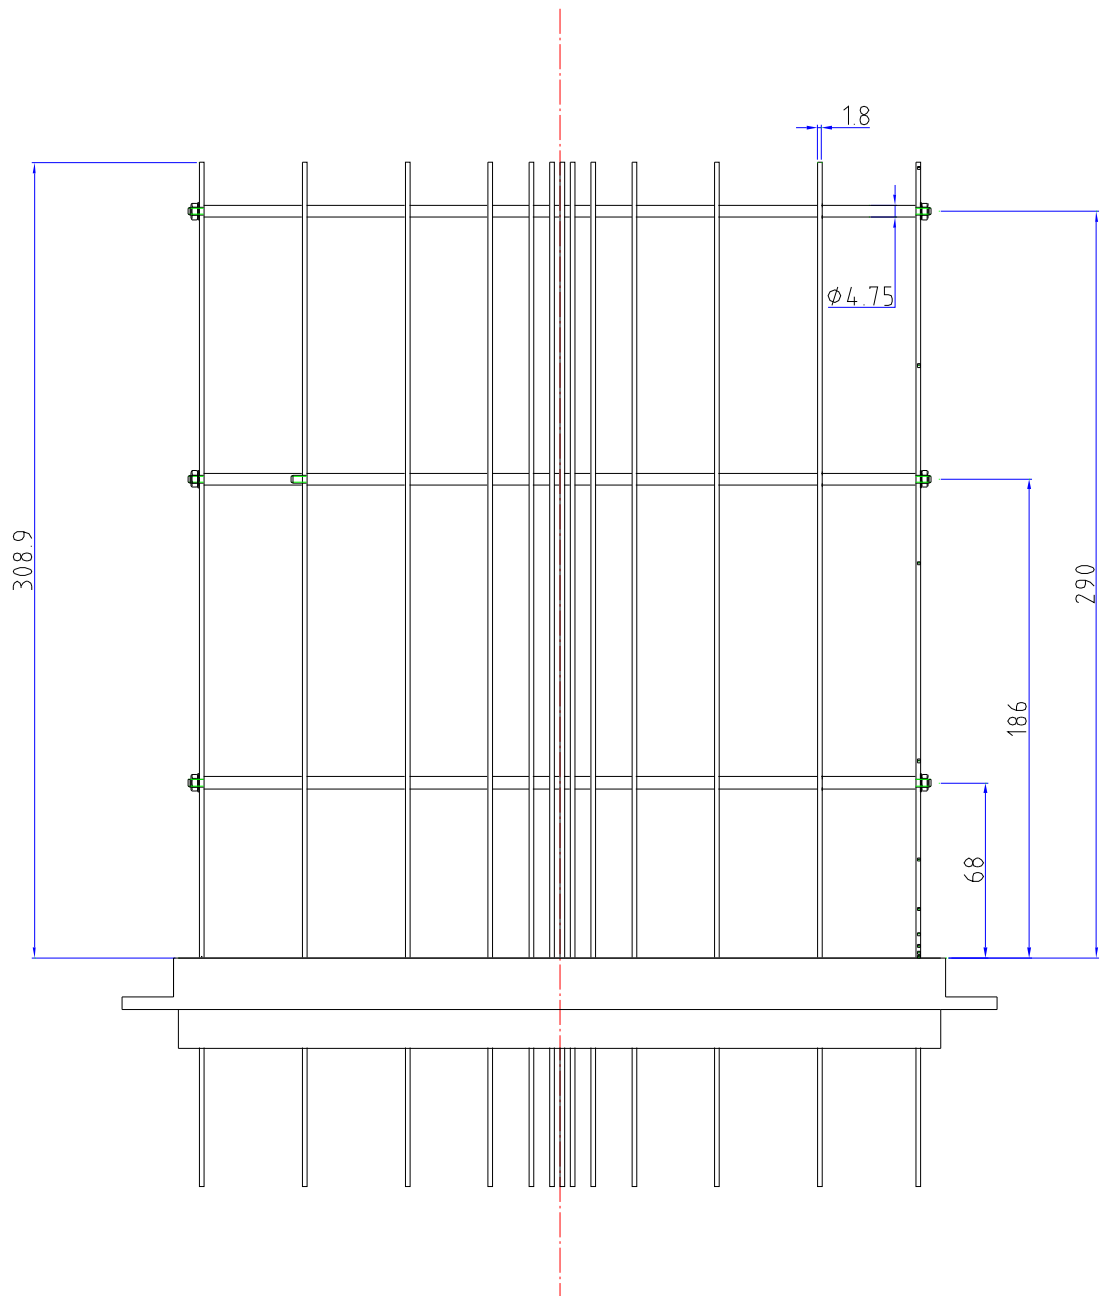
Front view of the hot-wire rake. All dimensions are in mm.
